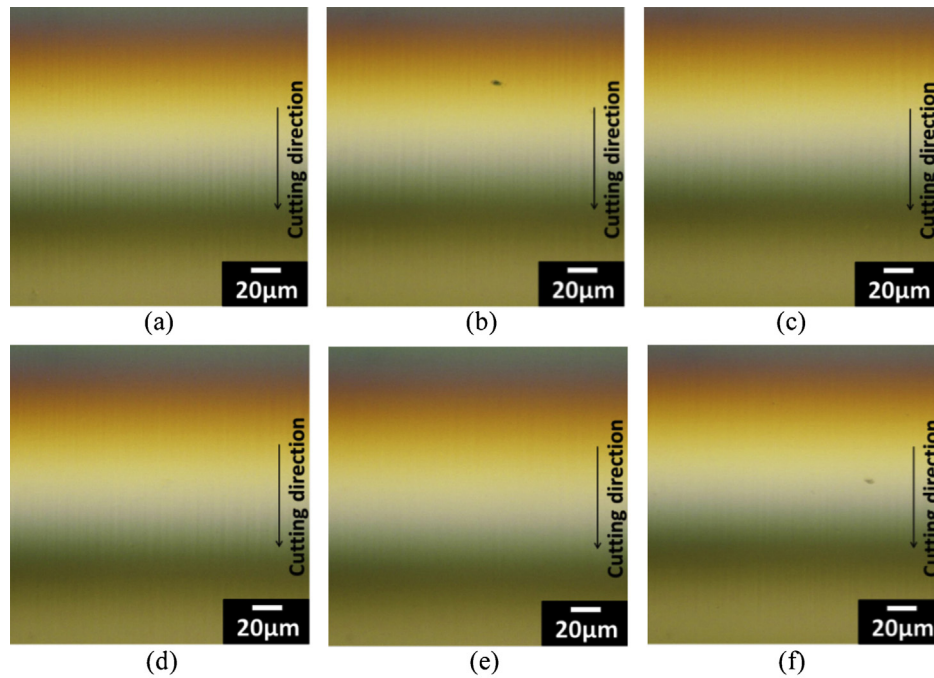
Machined cylindrical surfaces with end face (100), for (a) (010)[001], (b) (0154)[0–415], (c) (074)[0–47], (d) (011)[0–1–1], (e) (047)[0–74], and (f) (0415)[0–154].
